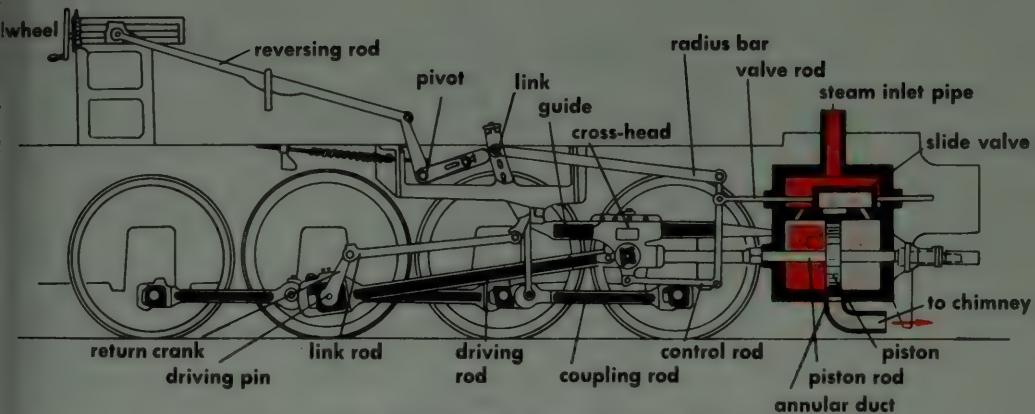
DRIVE MECHANISM AND CONTROL GEAR OF A STEAM LOCOMOTIVE
